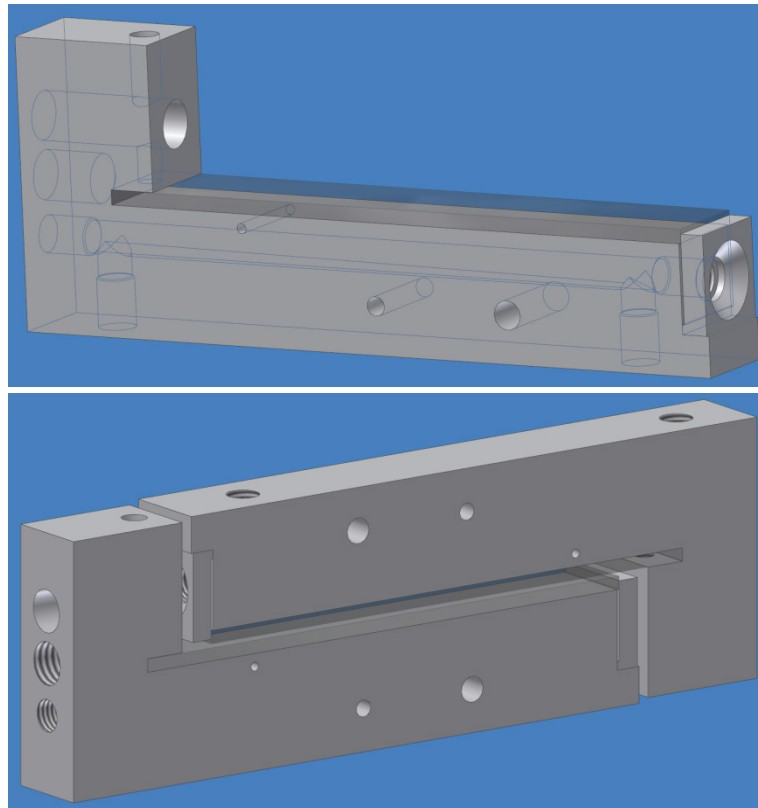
Testing jigs for PU-stainless steel adhesive joints
